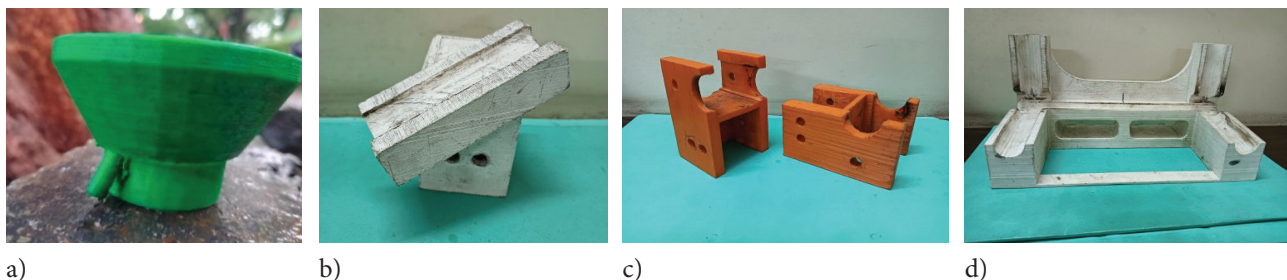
3D printed parts of fixture for Quad bike a) oil Tank Cap with funnel, b) fixture for camber link assembly, c) welding fixture for rear chassis' left and right mount position arm and d) welding fixture for rear chassis
